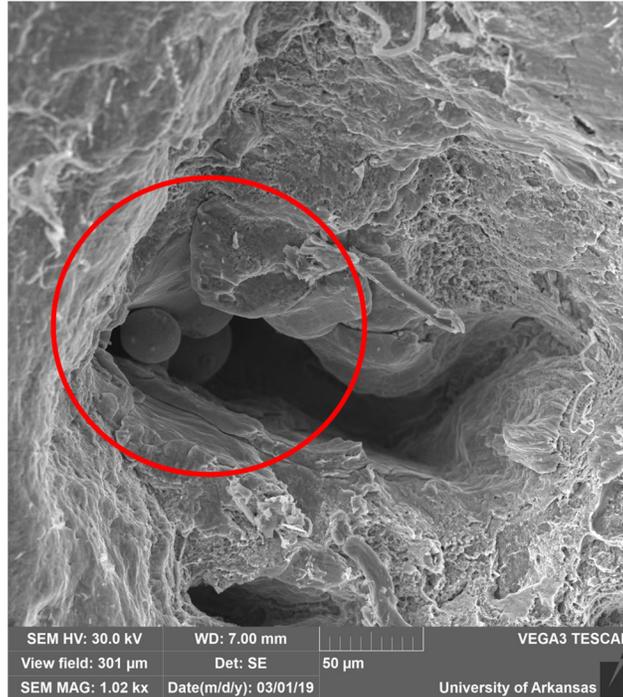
Fractographic image taken from AM steel failure surface.
